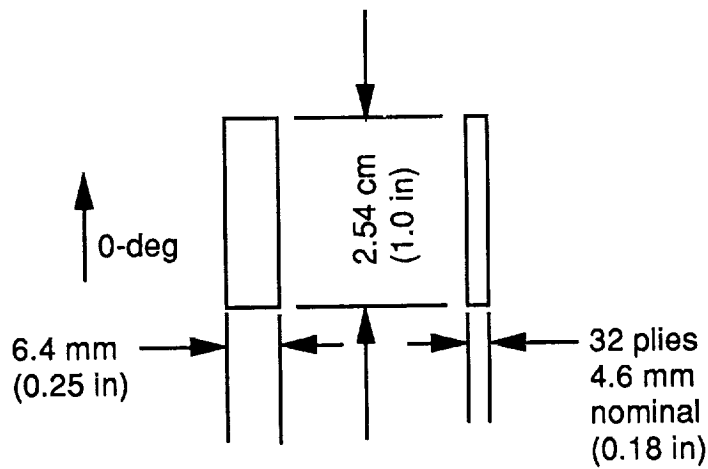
A 0-deg interlaminar shear test specimen, after ASTM D2344.
